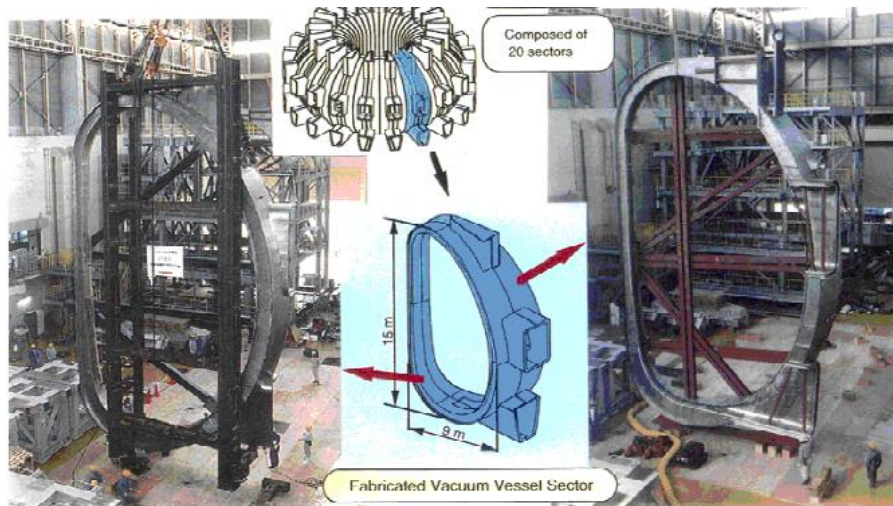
Welding of sectors of vacuum vessel [9]
